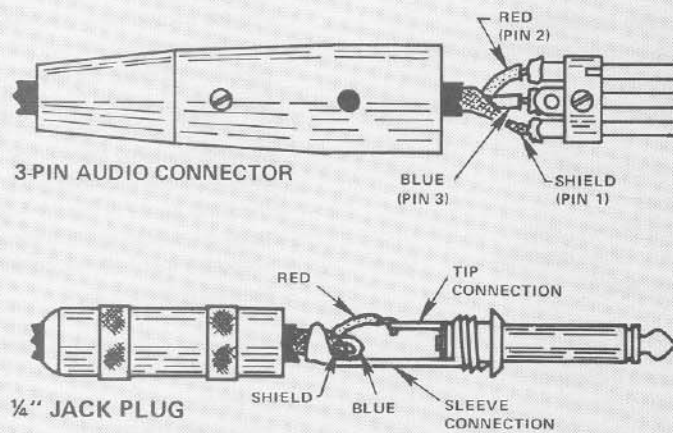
3-Pin Connector & 1/4" Jack Plug Wiring Connections
